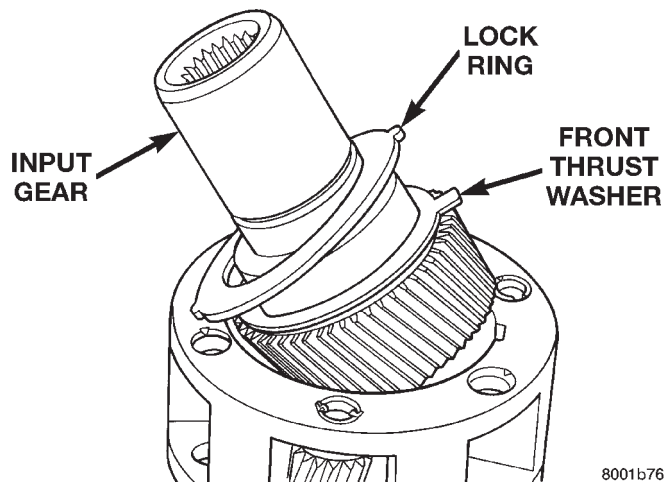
Input Gear, Front Thrust Washer, And Carrier Lock Ring Installation
